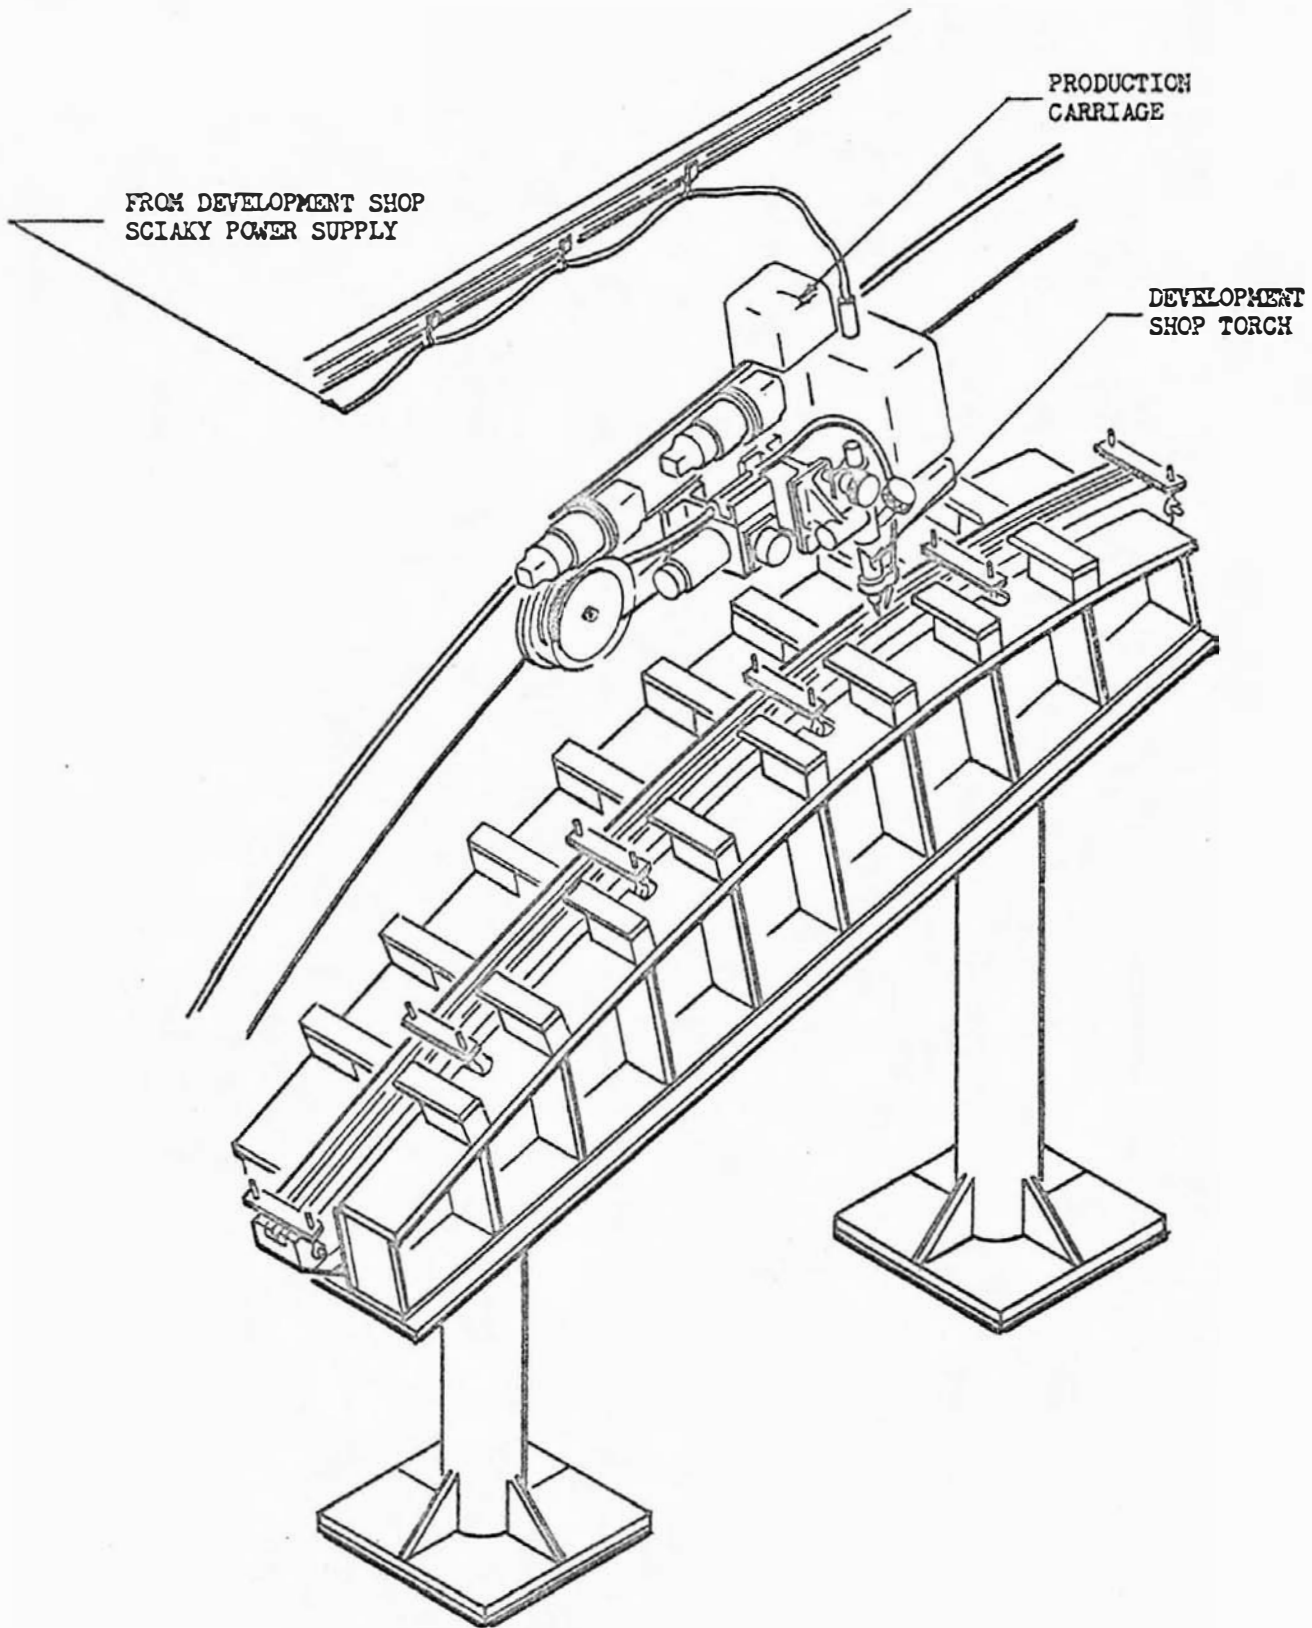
Gore-to-Gore Development Weld Fixture
